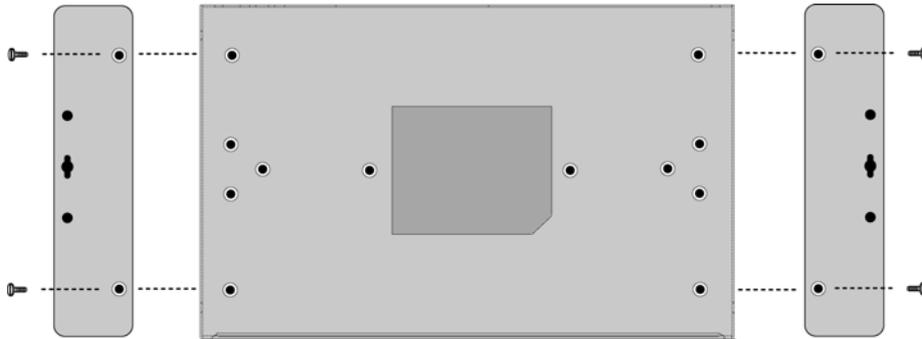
Series Universal Communicator—Wall Mounting Brackets (bottom view)
